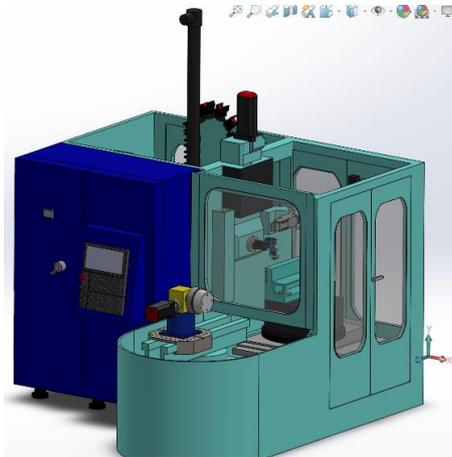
CNC TMA AL 550 Figure 3 CNC TMA AL 550 Printed Block Mounted [6] SolidWorks3D [6]
